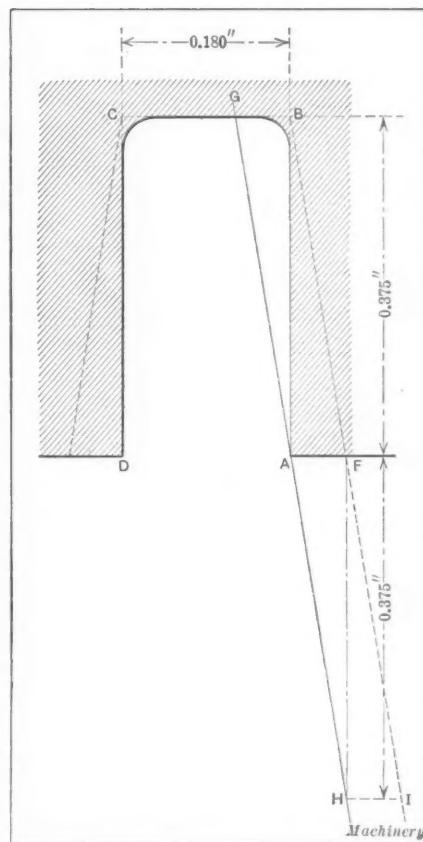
Method of doing Work by which Dimensions are determined by Machine
